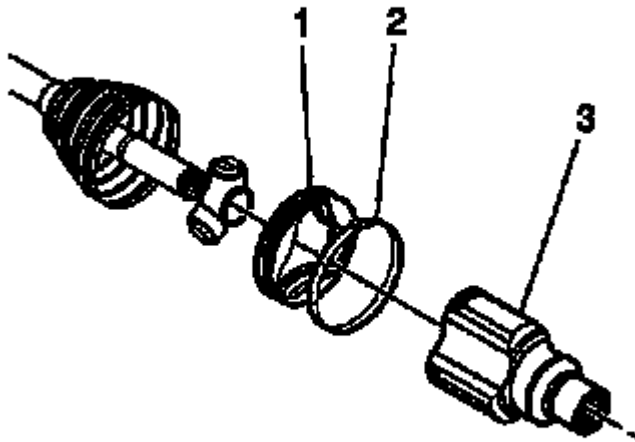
Drive Shaft Tripod Bushing Clamp And Tripod Housing
